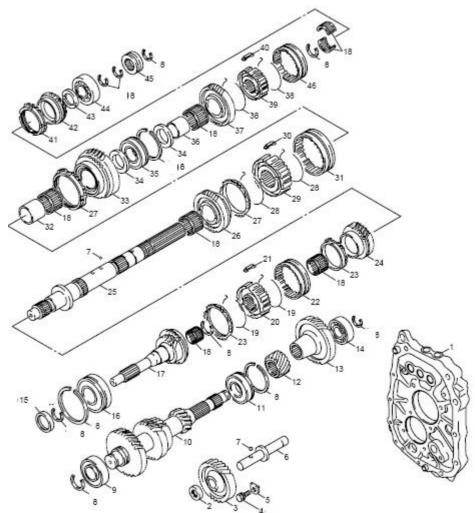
Input Shaft, Main Shaft, Countershaft and Reverse Idle Gear Shaft
